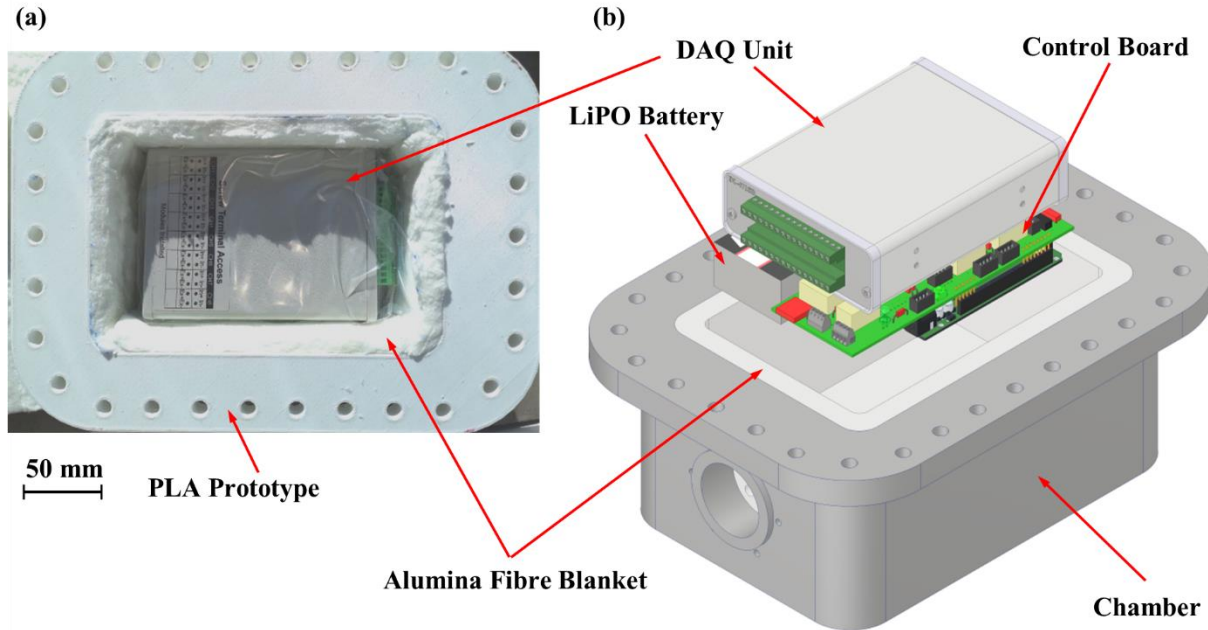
Insulating the enclosure's interior space with Alumina fibre blanket, (a) top view of PLA prototype, and (b) the isometric view of the 3D CAD rendering.
